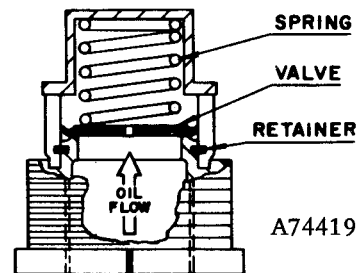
OIL FLOW CONTROL VALVE
